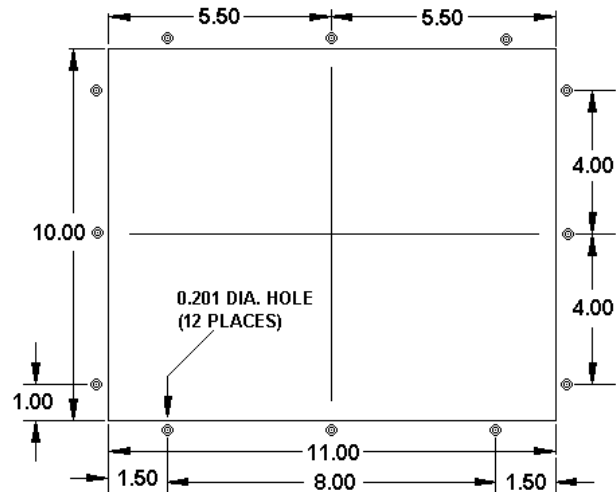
(Keypad Unit) Cutout And Torque Limits
